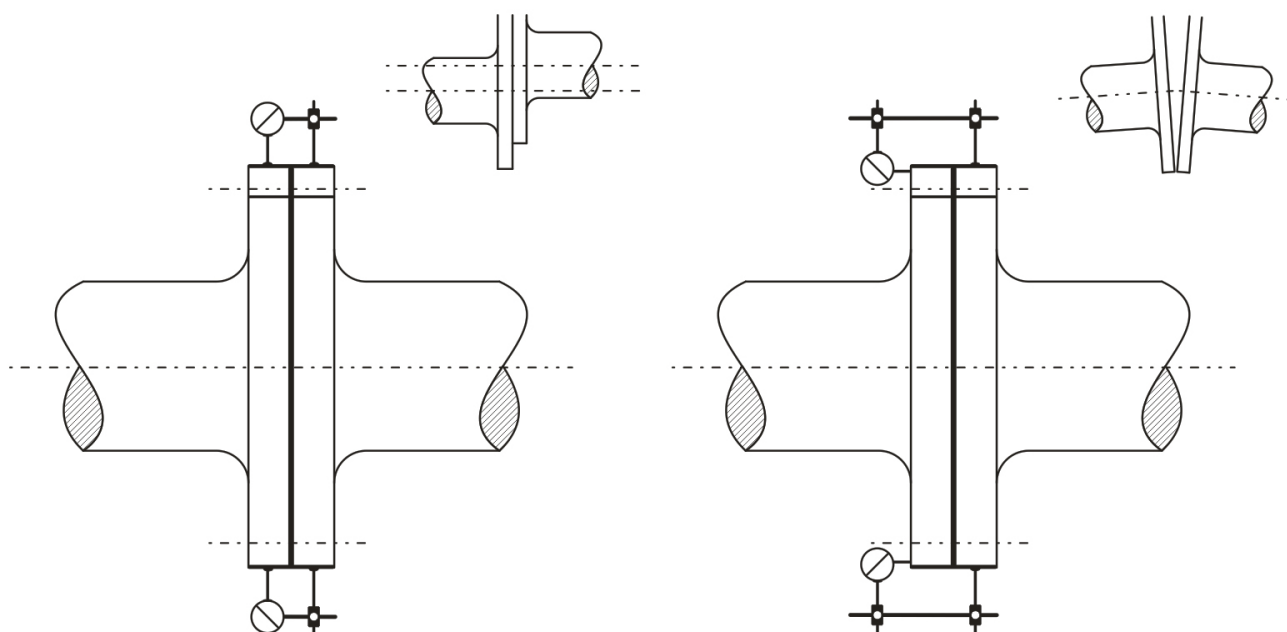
ALIGNMENT USING DIAL GAUGES - 1: RADIAL ALIGNMENT, 2: ANGULAR ALIGNMENT
